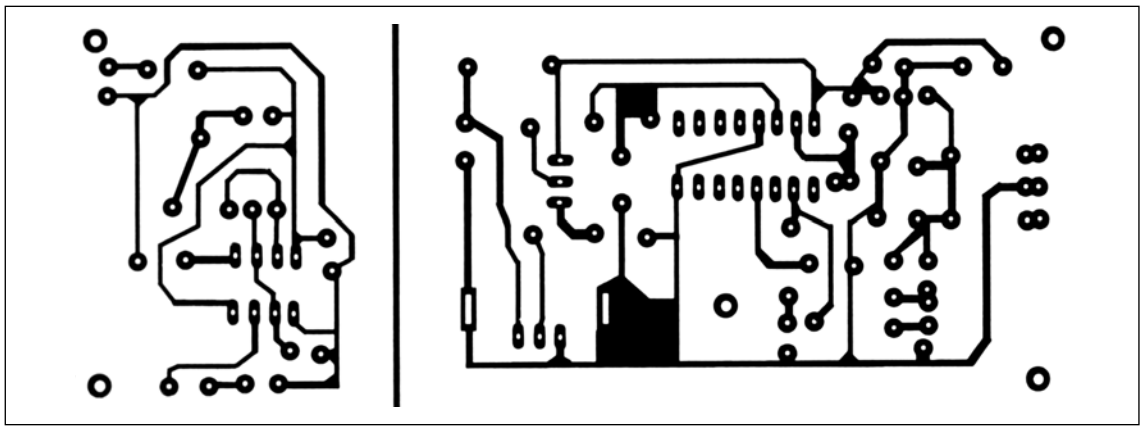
Actual-size PCB layout for the circuit shown in Figs. 3 and 4.
